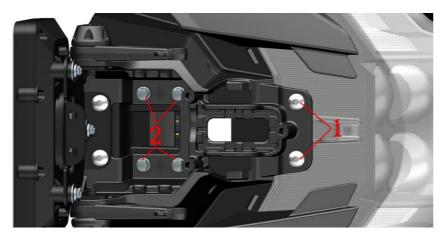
front fork component		Head cover aluminum bracket, instrument component	CHK	40)
